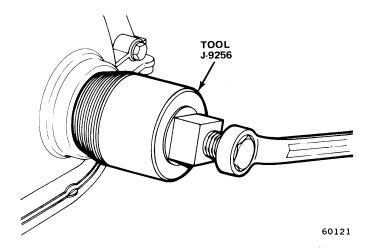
A-27 Timing Case Cover Oil Seal Removal
